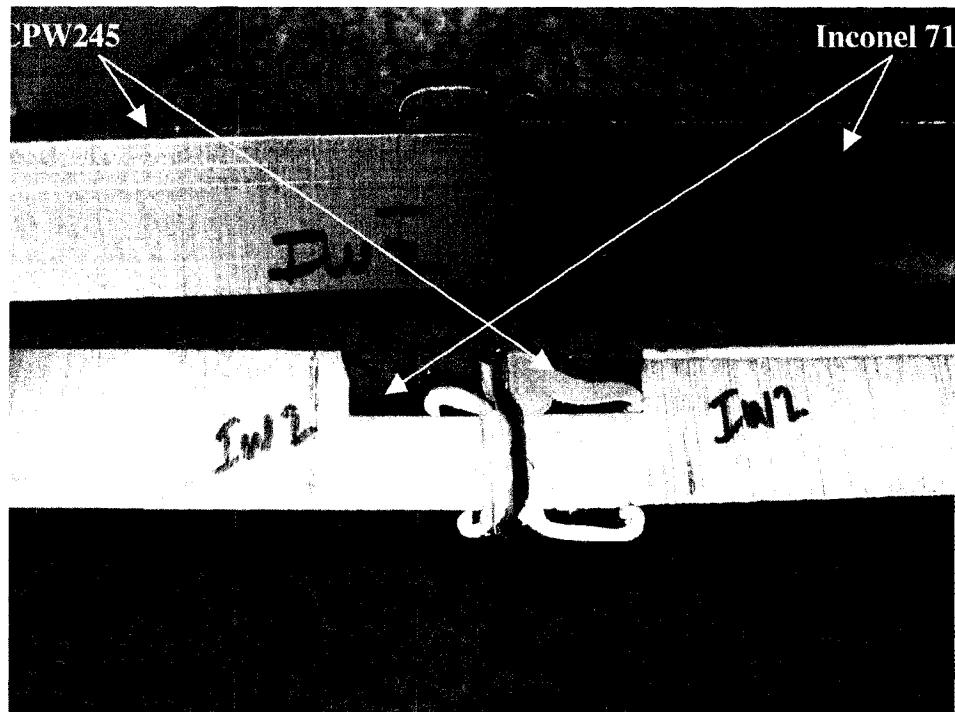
IW2 - Profile of the weld after tensile test
